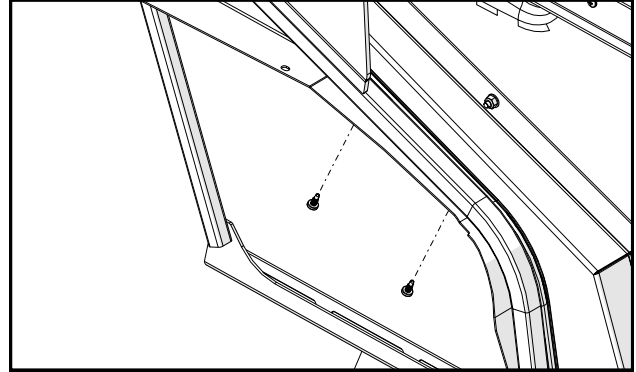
(re-install lower (2) Screws - Drive only)
